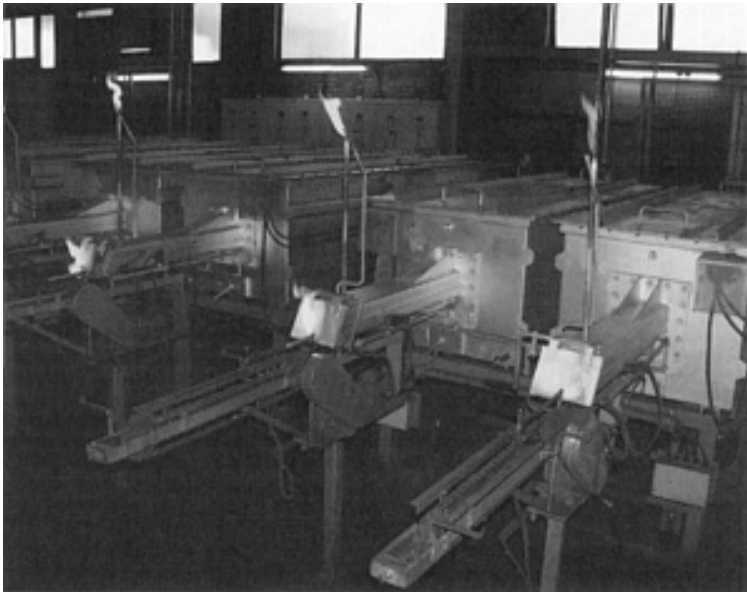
Single-tube push type tungsten carbide powder production furnace. Courtesy: Wolfram Bergbau- und Huetten-GmbH Nfg KG, Austria
